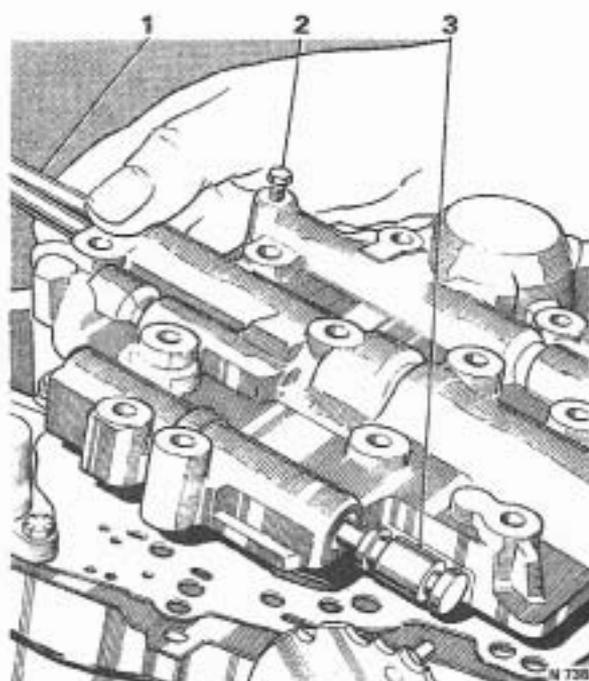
REMOVING THE CONTROL VALVE UNIT
